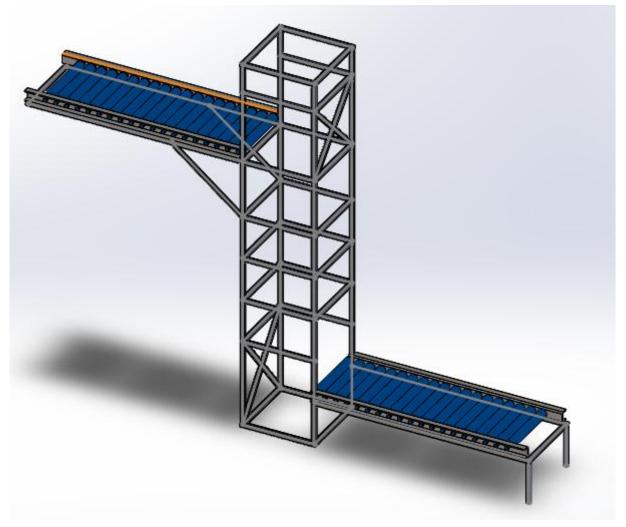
External Skeleton Frame of the System consisting of 2 conveyors
